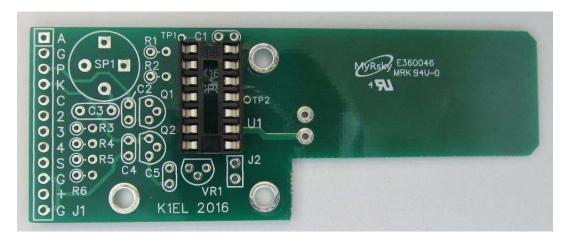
Install socket, pin 1 to upper left, and solder in place
